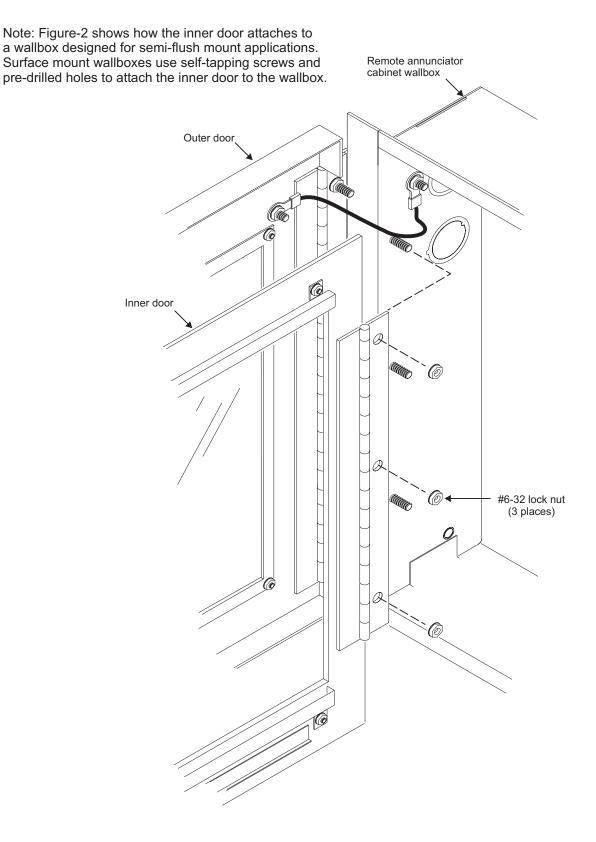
Typical inner door installation (semi-flush mount wallbox shown)
